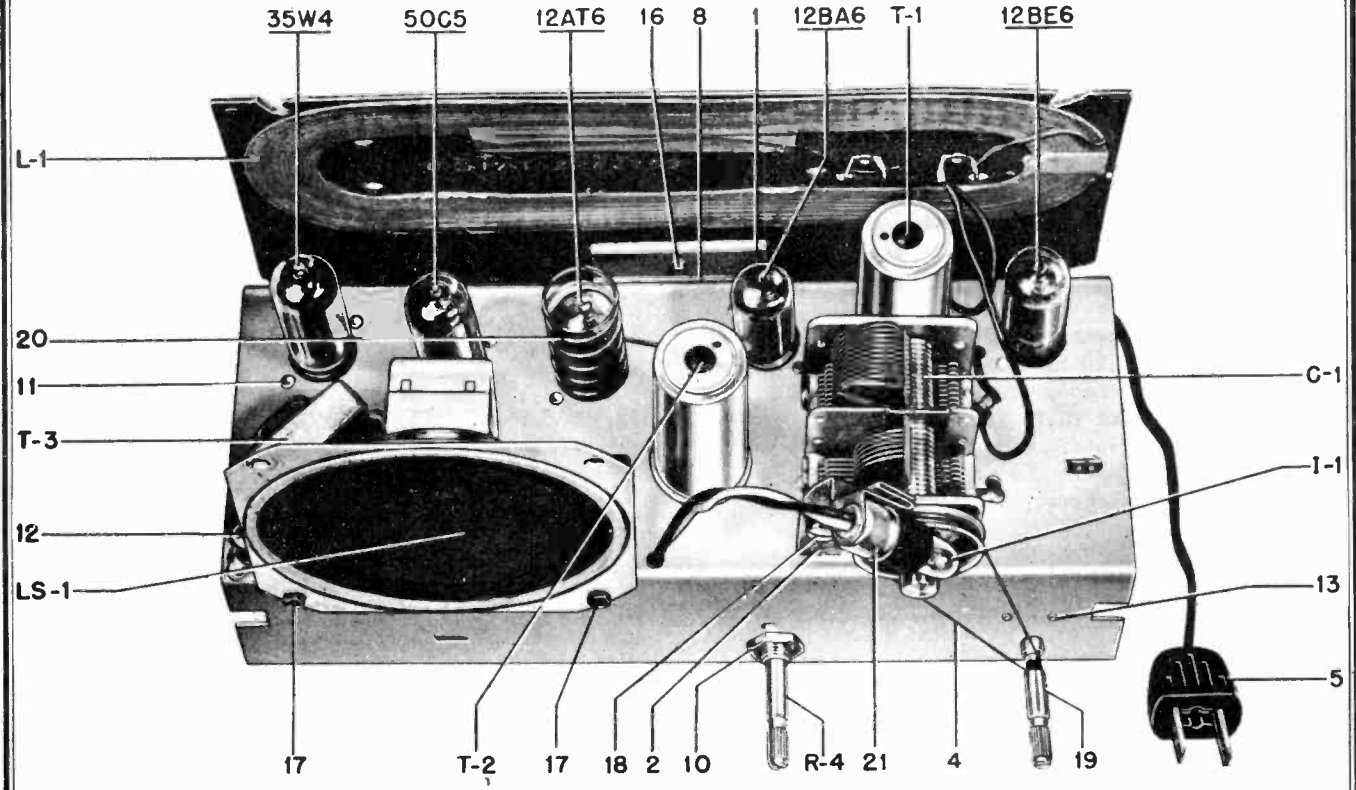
CHASSIS PARTS LOCATION - TOP VIEW
